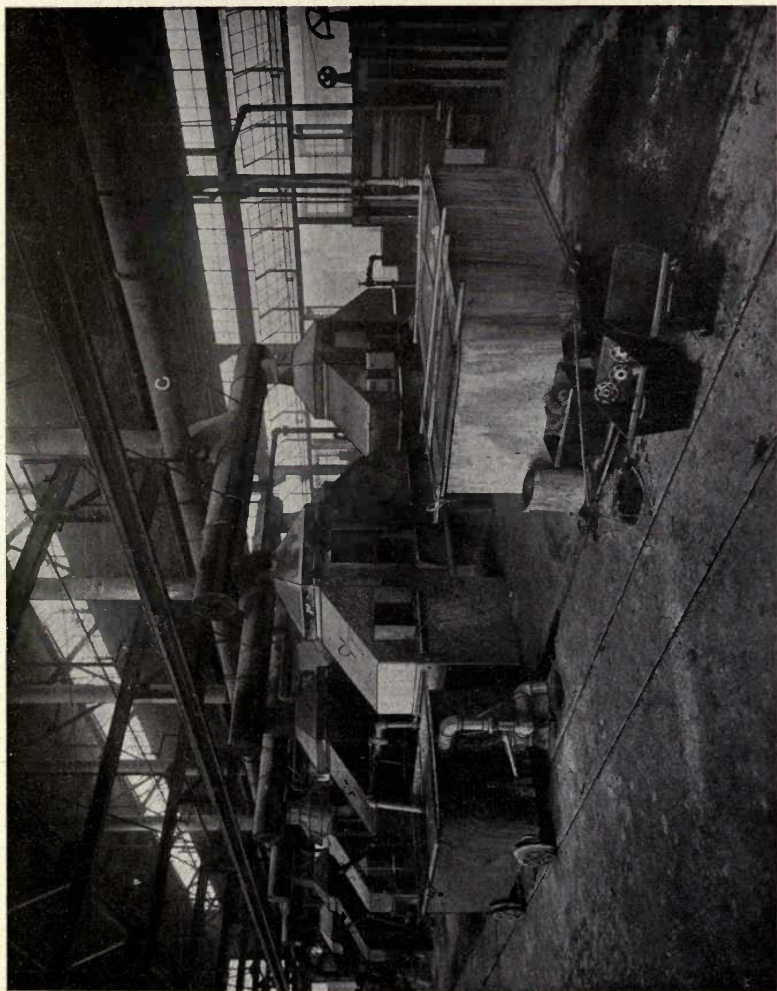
Cyanide Furnace, Quenching Tank and Car Tank with Flowing Oil. ("Machinery.")
